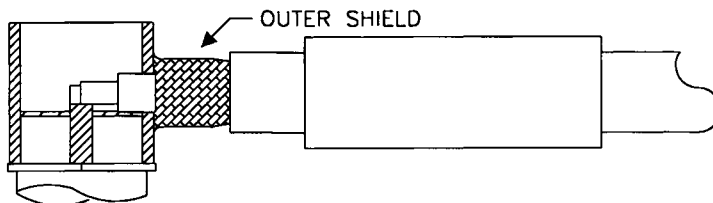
KMD 150 Right Angle Rack Connector Assembly
